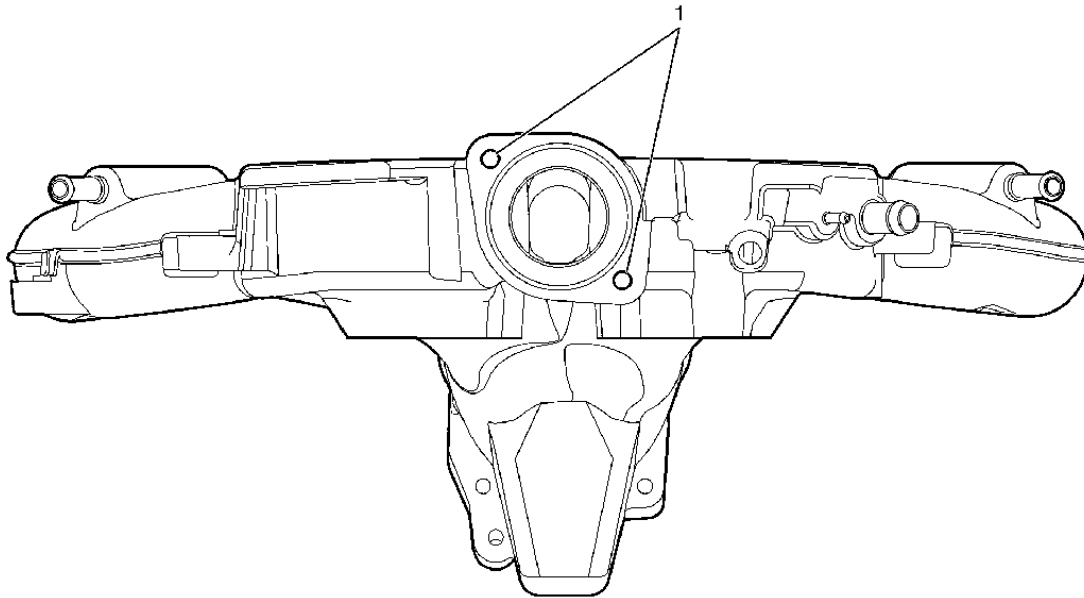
Identifying Upper Intake Manifold - Front
